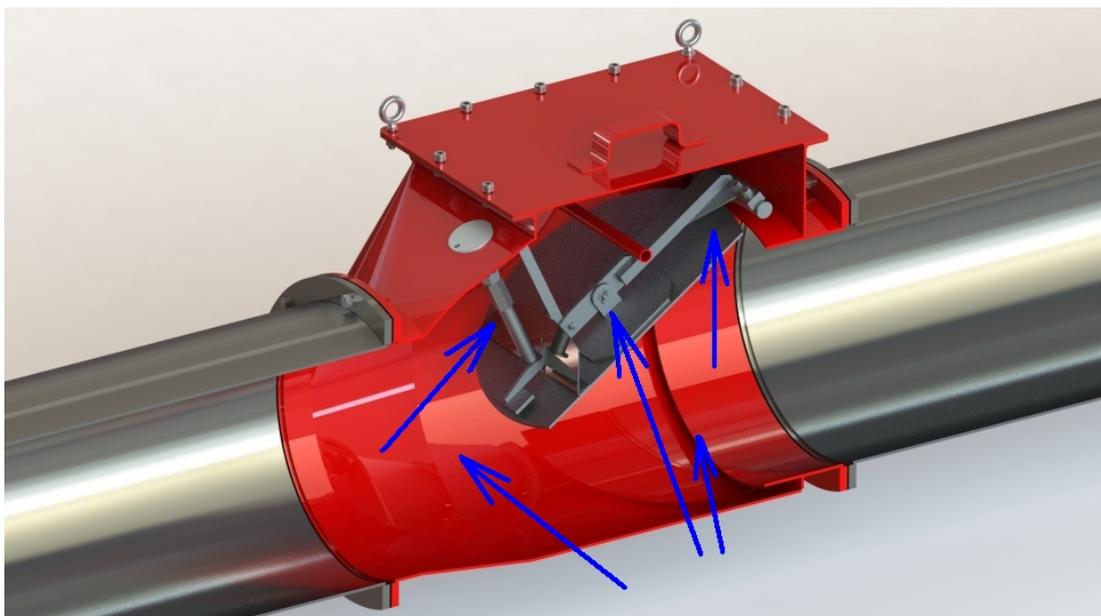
Section through B-FLAP indicating important areas of the valve for checking
